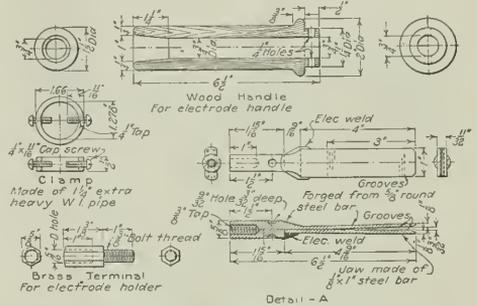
Electrode Holder and Cable for Use in Welding
